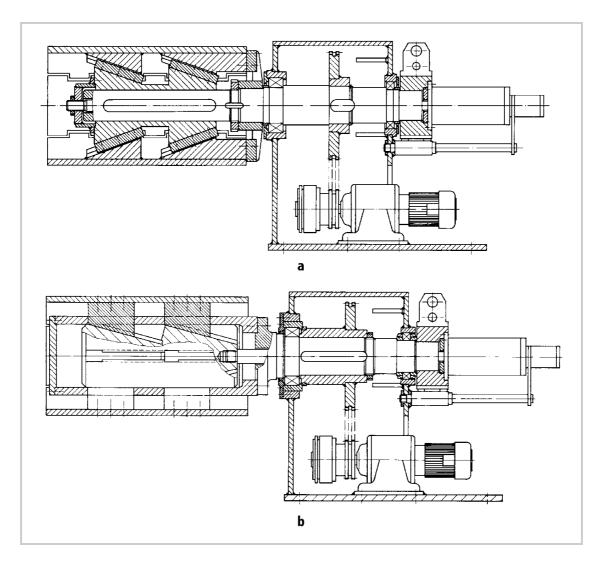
Winding machine (Ernst Julius KG): a winding head with integrated drive unit; b winding head with separate drive unit
